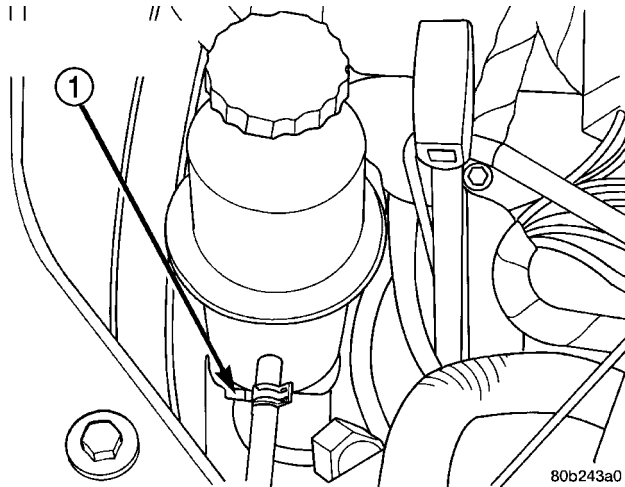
Pressure Hose Connection To Power Steering Pump (2.7L Engine)
